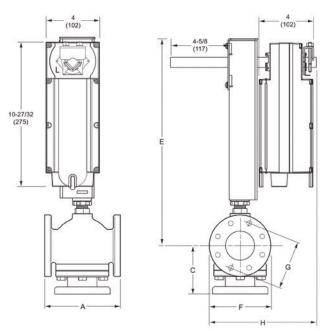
Mx40-717x-2xx with $2\frac{1}{2}$ " to 4" 3-Way VB-9313 Flanged Globe Valve With AV-607-1 Linkage. Mx40-717x with 5" and 6" 2-Way VB-9313 Flanged Globe Valve with AV-609-1 linkage
